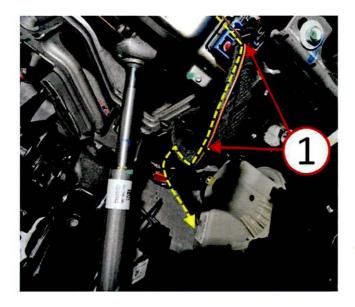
Right Hand Heated Mirror Wire Routing Driver Side
